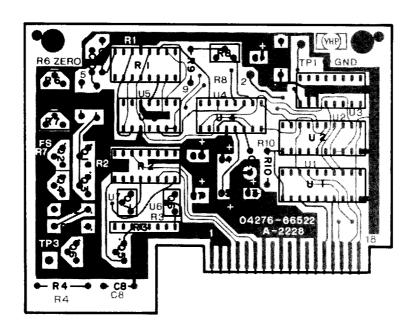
A22 OPTION 001 INTERNAL DC BIAS Board Assembly Component Locations.
